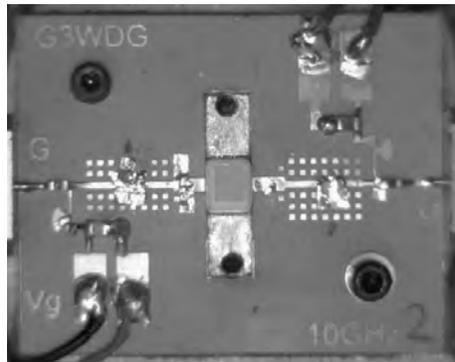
Early prototype 10GHz PA using a packaged 6GHz device
